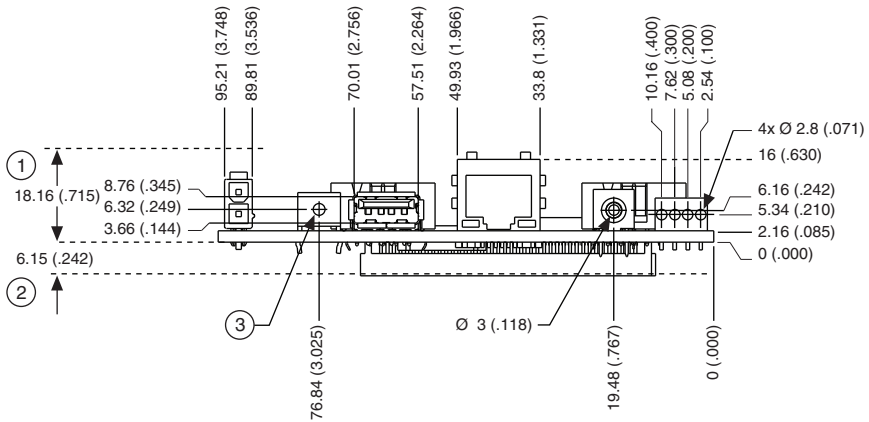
NI sbRIO-9623/9633/9626/9636 Secondary-Side Dimensions in mm (in.)
